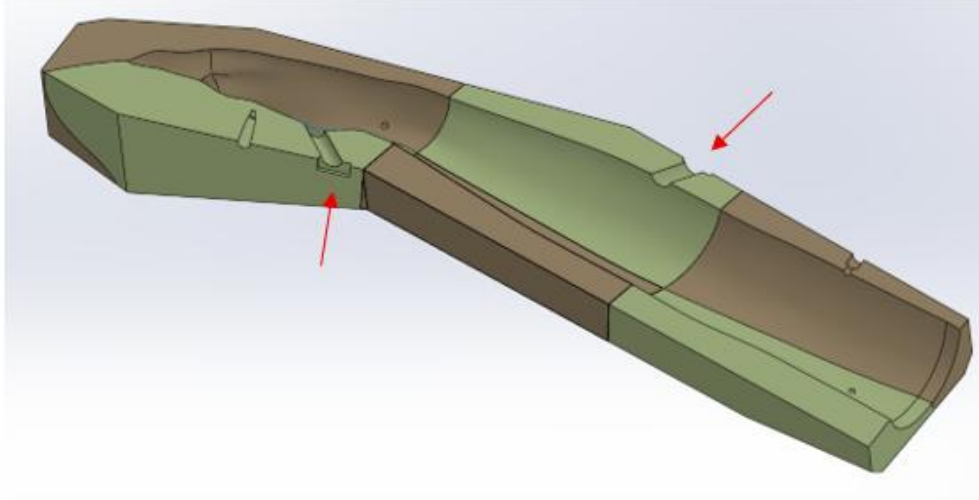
Cross section view of silicone mold. Injection ports locations pointed with red arrows.
